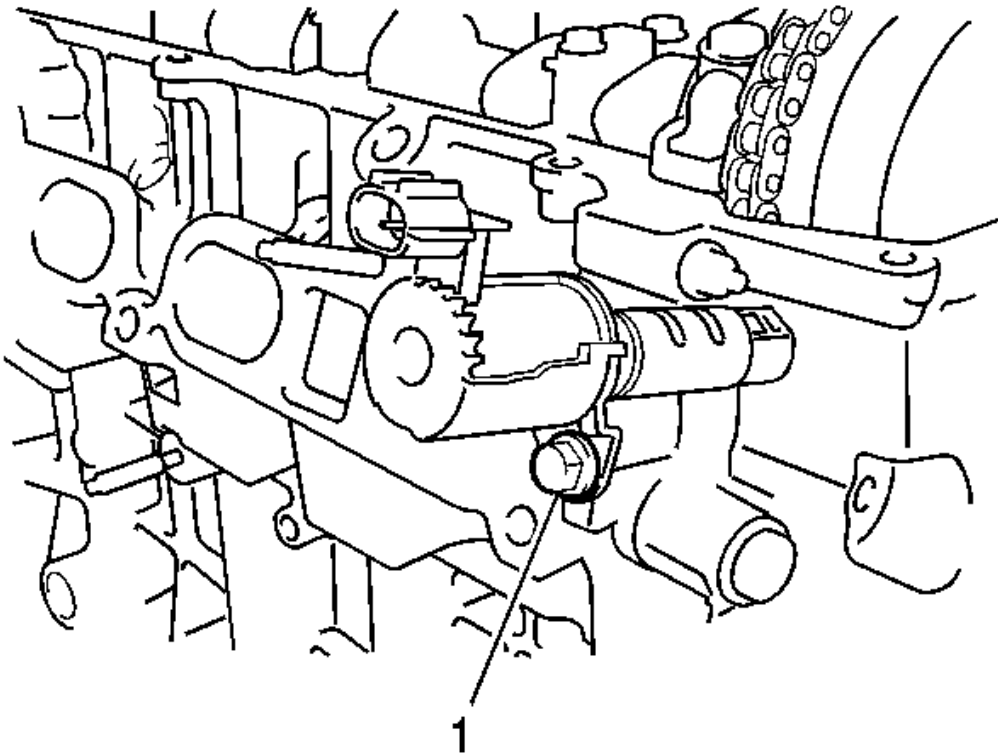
Identifying Camshaft Timing Oil Control Valve Assembly
